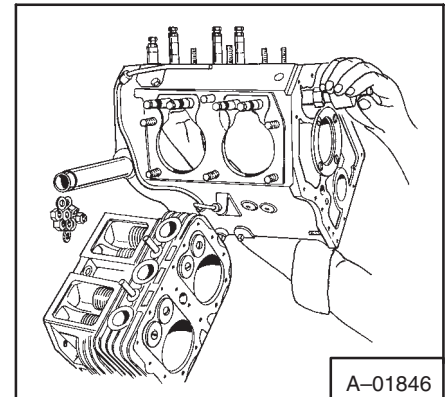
A-46 Crankshaft Seal Location (3 Bearings)
